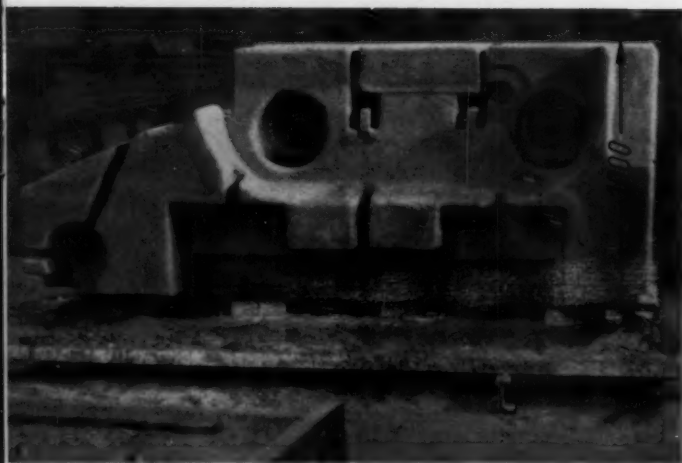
CO₂-hardened core for 4-ton steel casting. Height of the casting measures 39 in.
